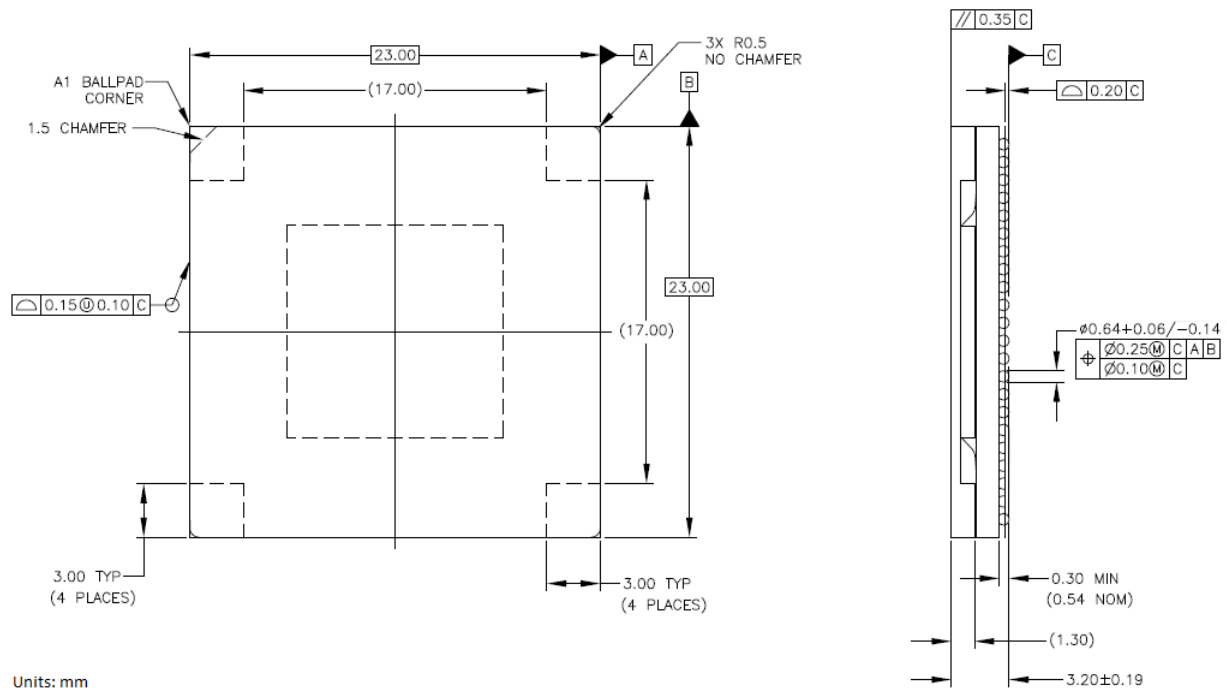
• MPF300T/TS-FC484M Package Bottom-View
